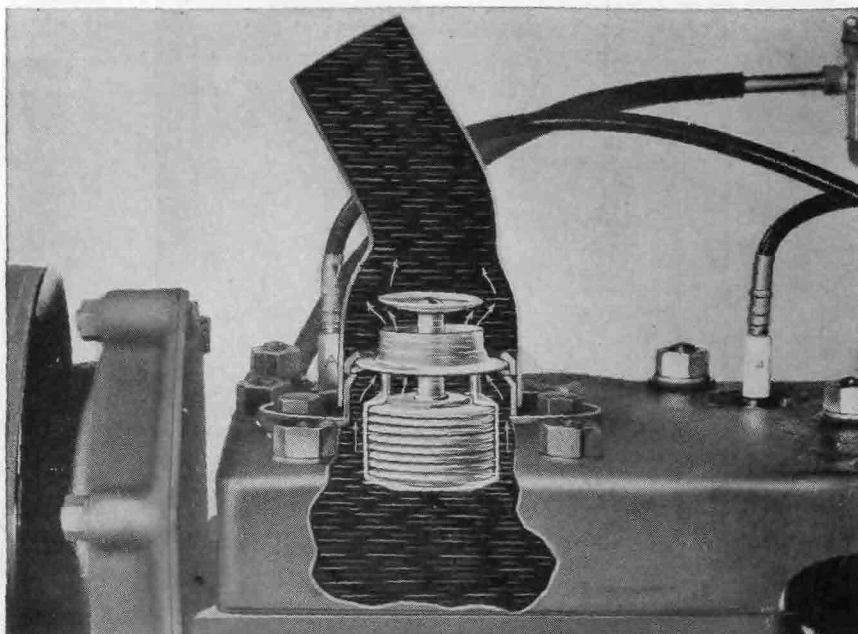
Thermostat in place in cylinder head, showing water circulation through thermostat when thermostat is opened. (*Studebaker-Packard Corporation*)
